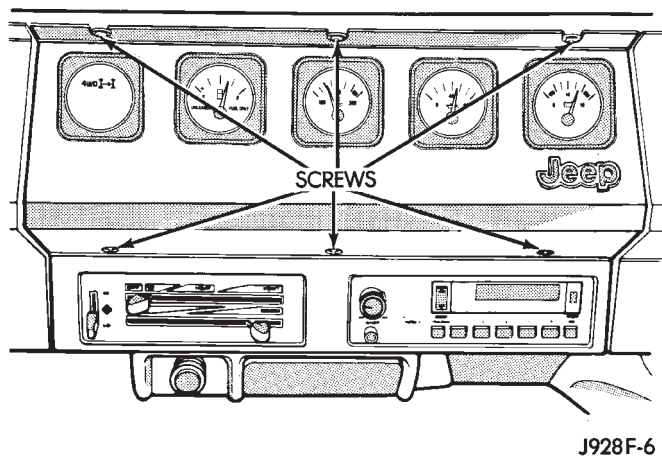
Center Cluster Bezel Remove/Install - YJ
